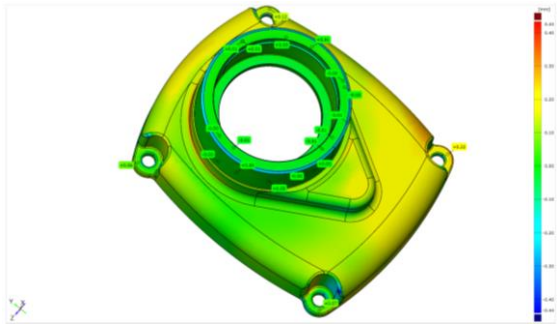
Mutual alignment of the reference CAD prototype and the digitized STL model of the lower half of the mixer gearbox (chip-machined selected casting surfaces) [GOM GmgH]
